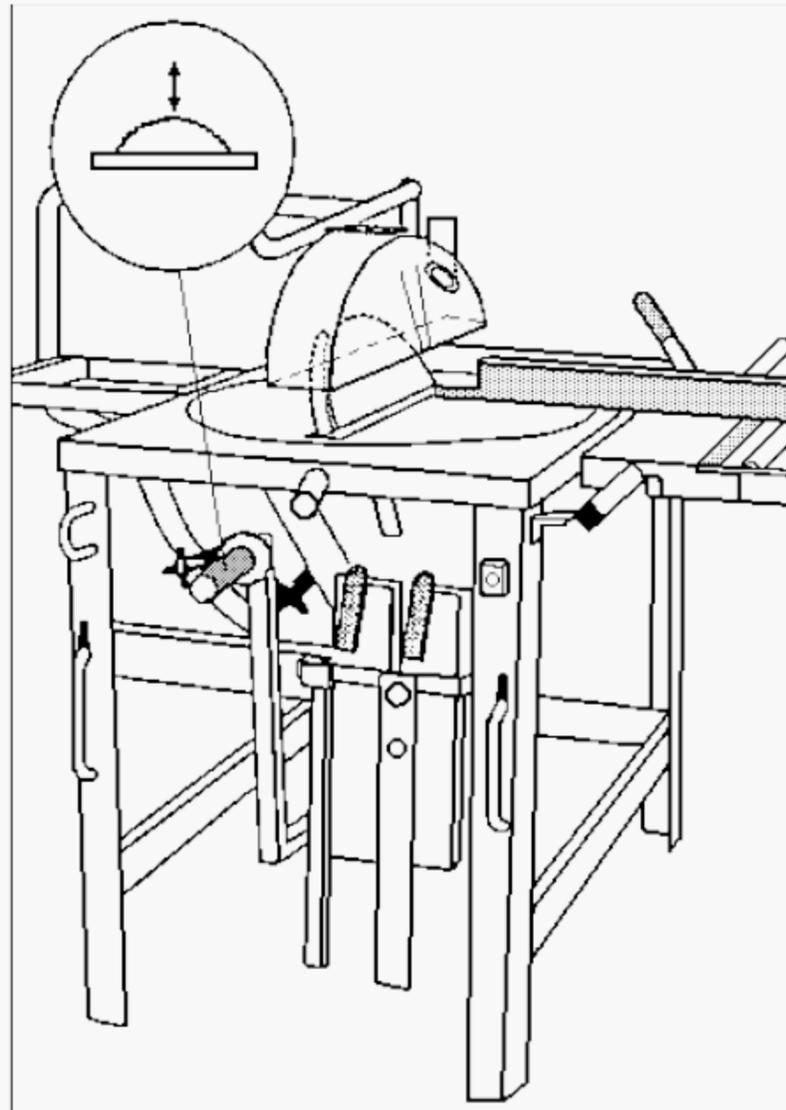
Example of a machine in the cross-cutting mode with stationary workpiece
